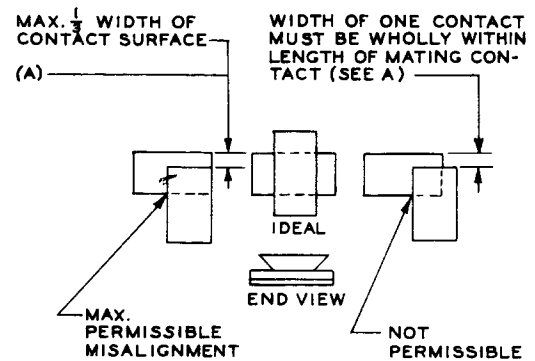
Fig. E — Alignment of Heavy Contacts — Plan View of Contact Surfaces
